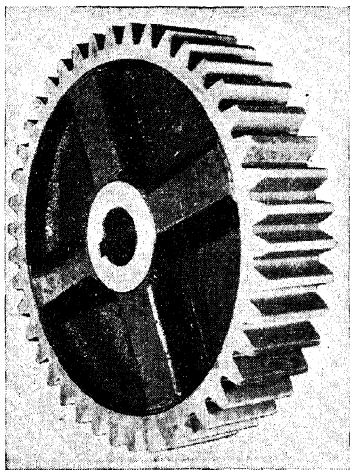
Spur gear, welded construction. (Courtesy Lukenweld, Inc.)
